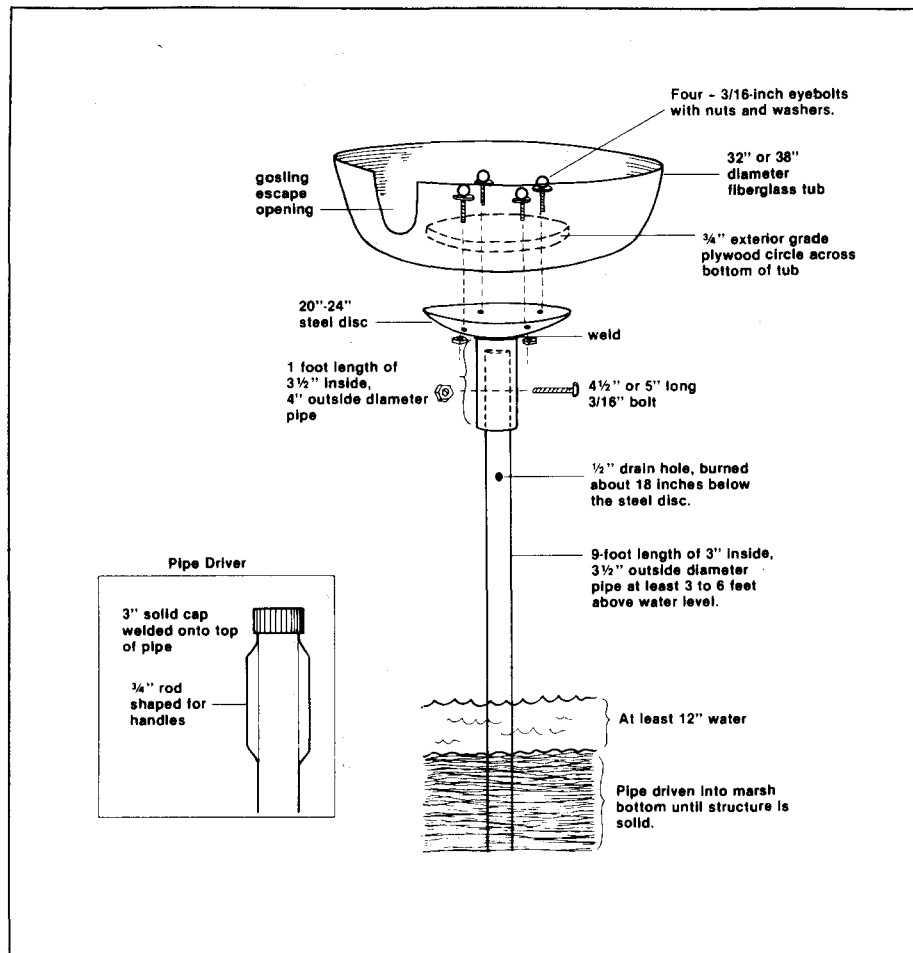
Construction of the structure and pipe driver is relatively simple although welding equipment is required.
